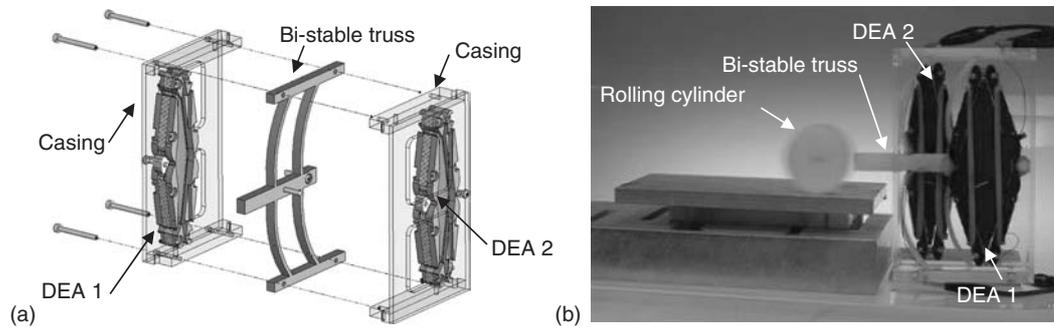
Antagonistic bi-stable module: (a) exploded view and (b) prototype.
